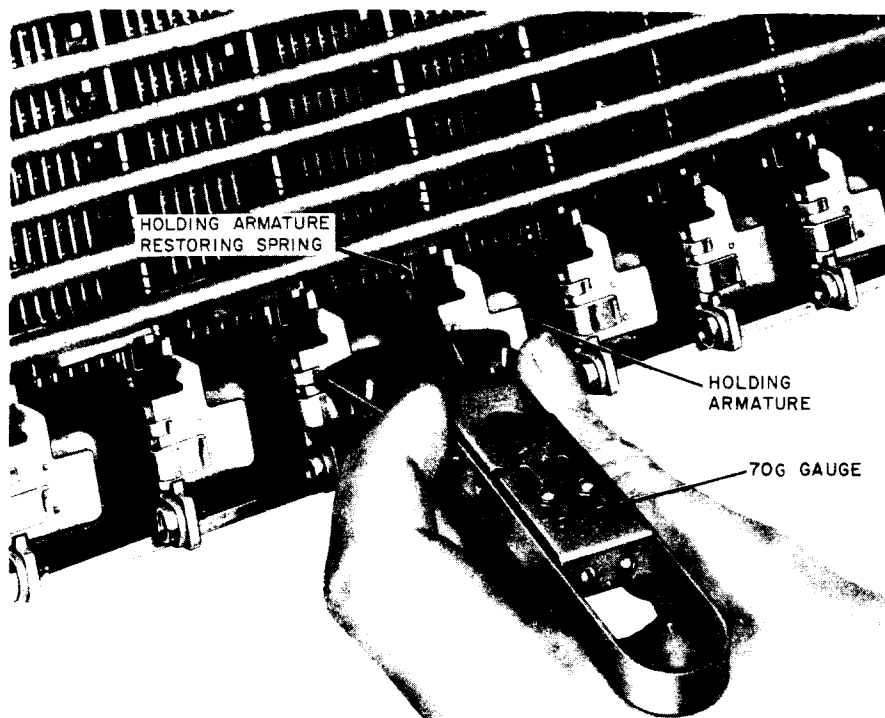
Method of Measuring Holding Armature Restoring Spring Force
